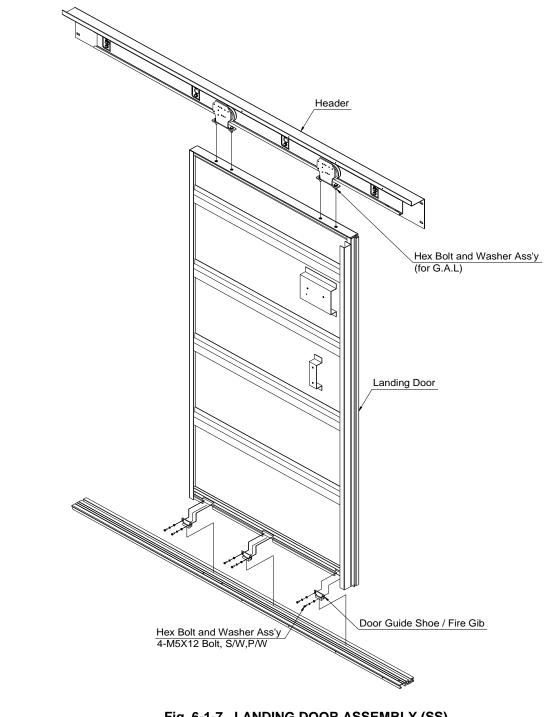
LANDING DOOR ASSEMBLY (SS)
